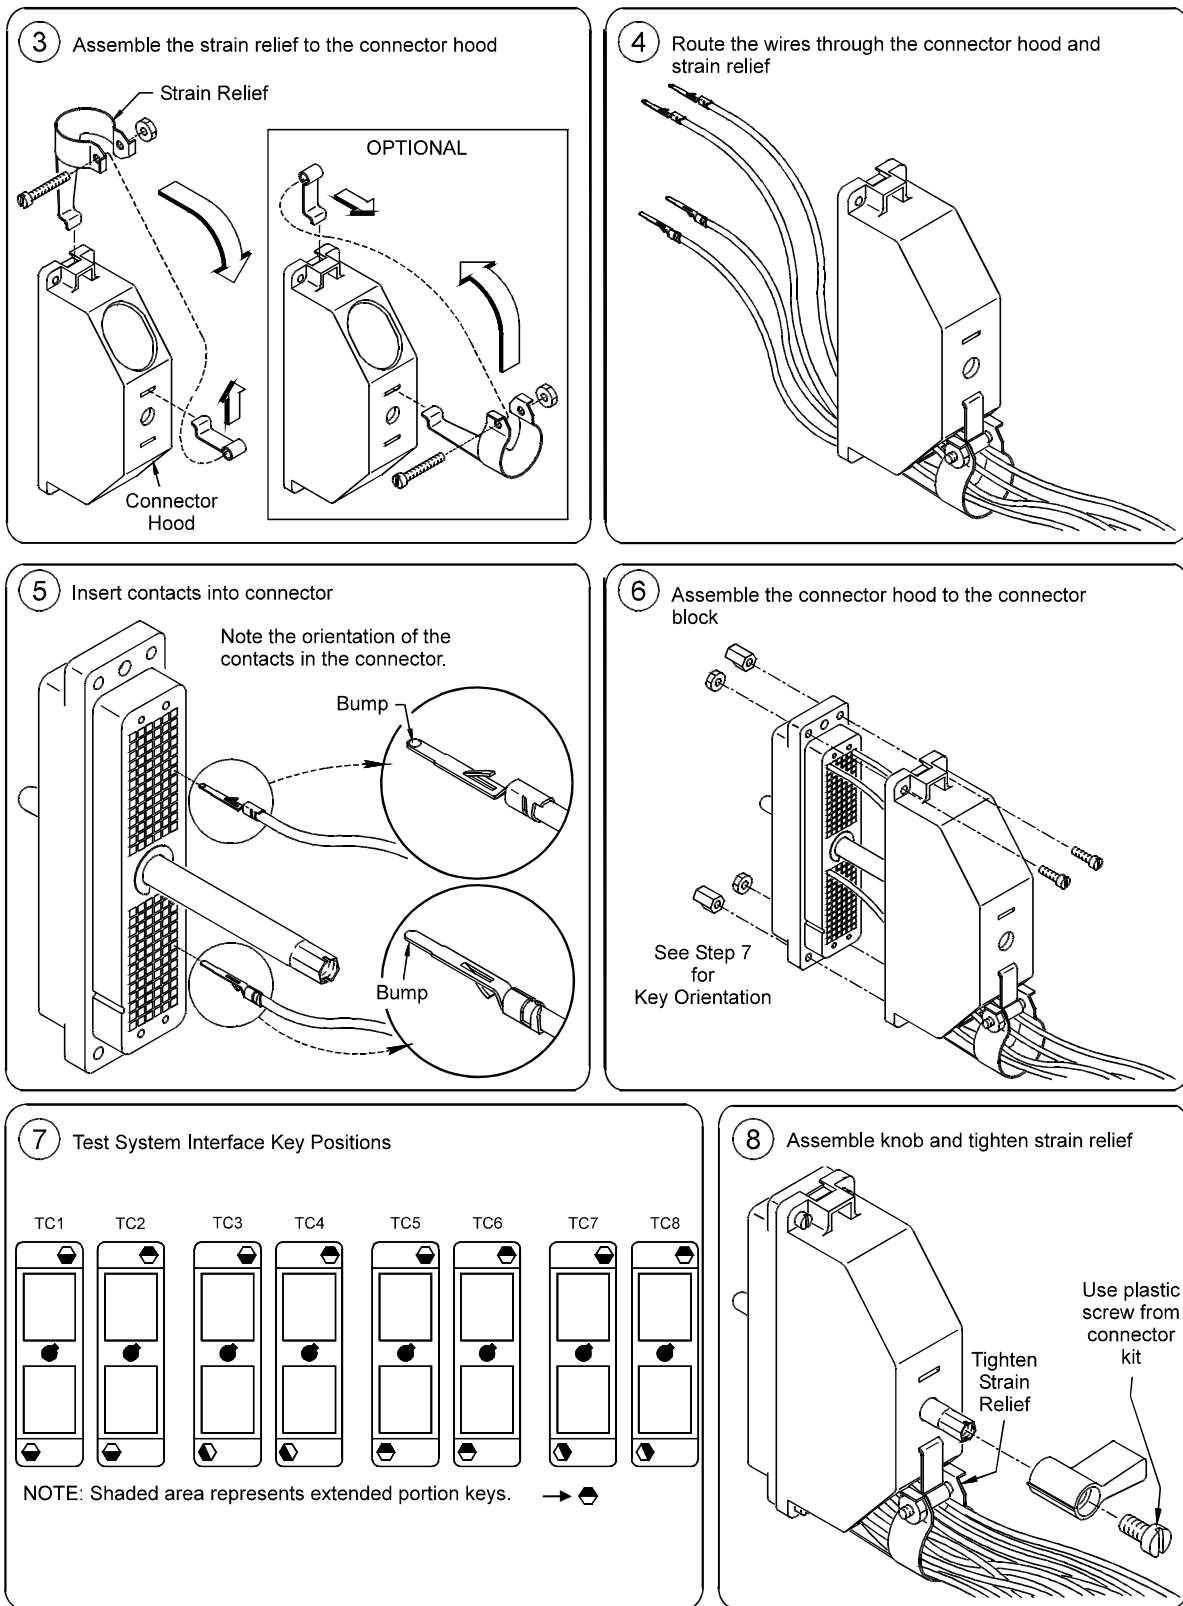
Assembling TC1 - TC8 Mating Connectors
